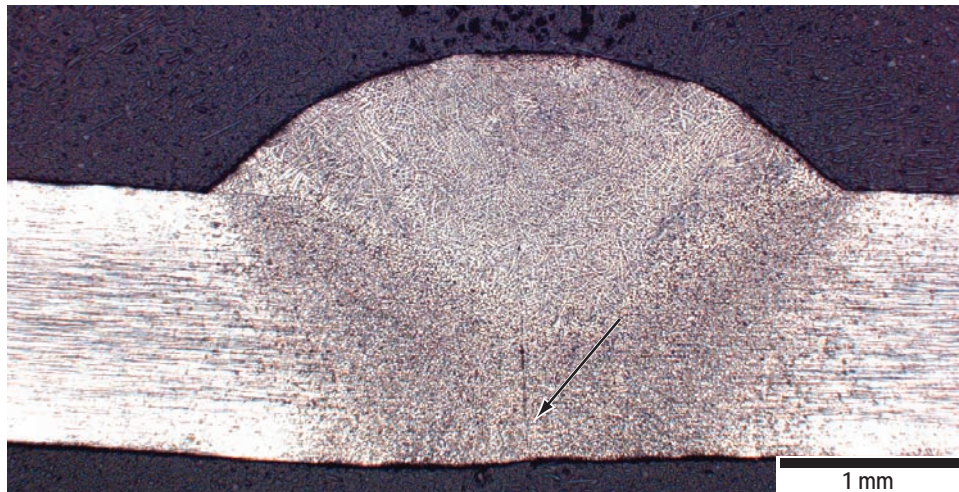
Transverse macro of JT-09. The lack of penetration can be seen in the center of the weld near the root side.
